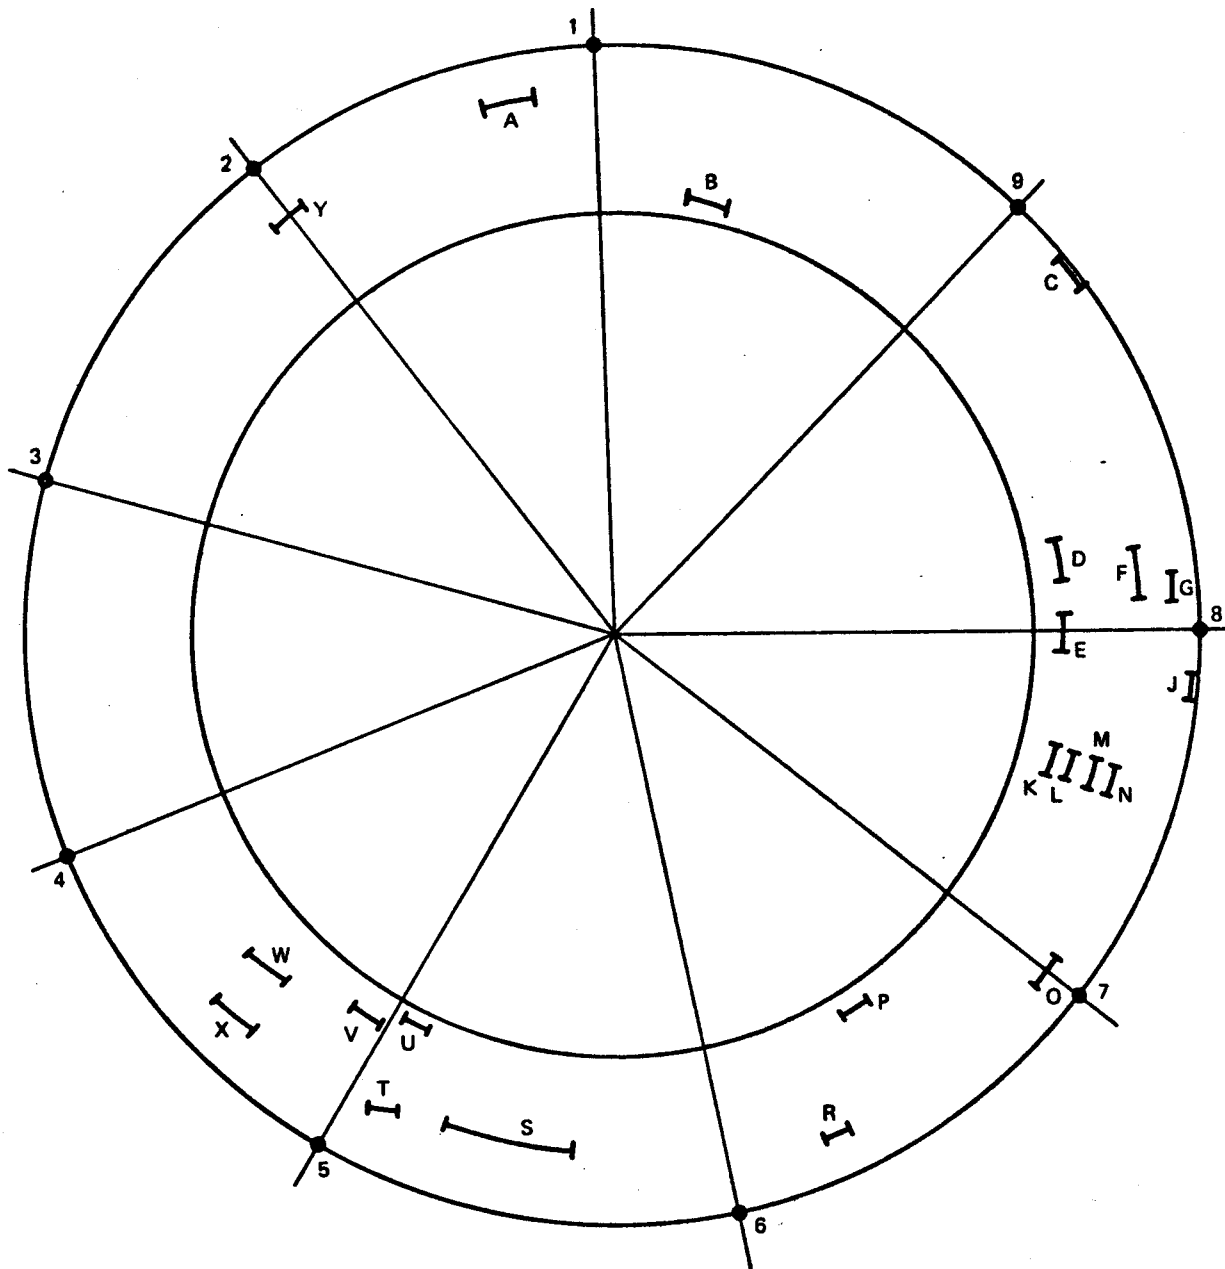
CIRCULAR PATCH TEST WELD II LONGITUDINAL WAVE EXAMINATION
